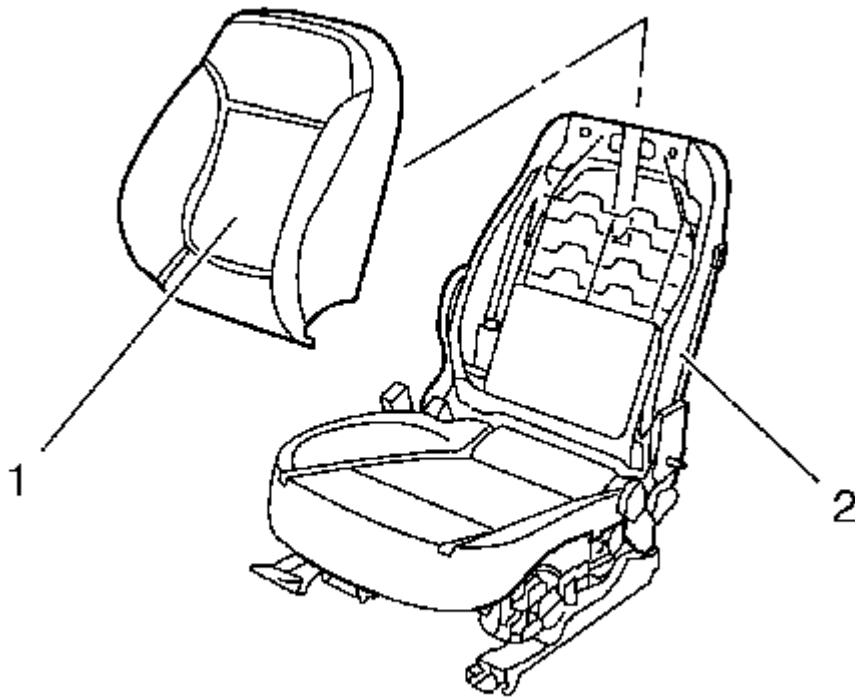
Front Seat Back Cushion With Cushion Pad And Backrest Frame
